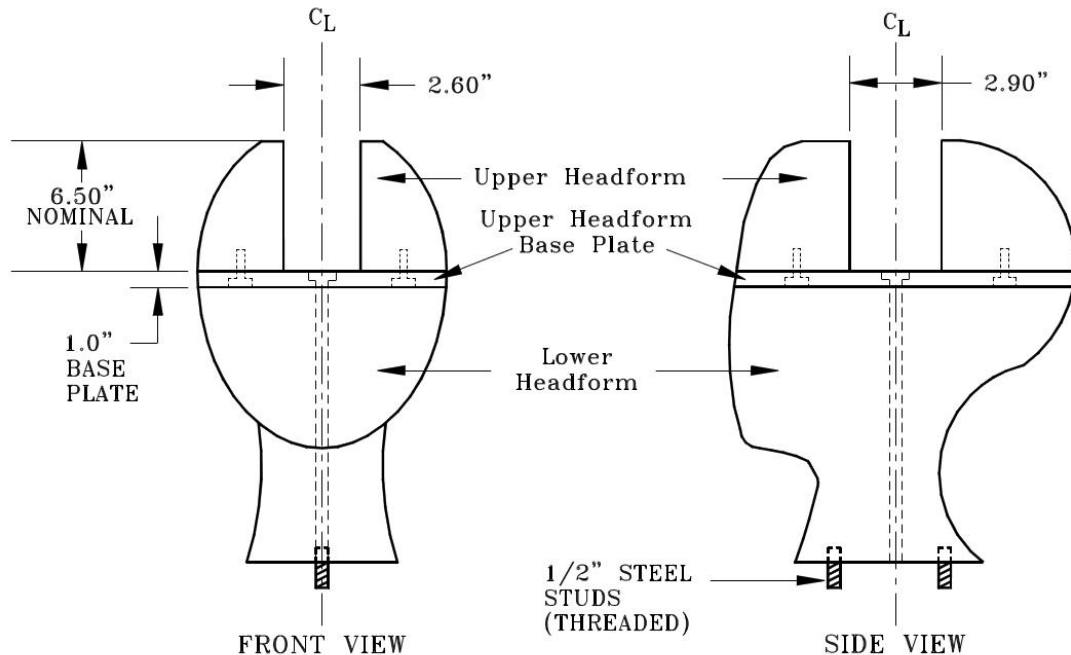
H.P. White head form: Only one headform is used for all impact tests. Overall dimensions comply with NIJ-STD-0106.01 (hat size 7¼). Upper portions, including the base plate, are made of 6061-T6 aluminum or equivalent. Lower head form is of USG epoxy #303. SOURCE: H.P. White Laboratory, Inc., 1995.
